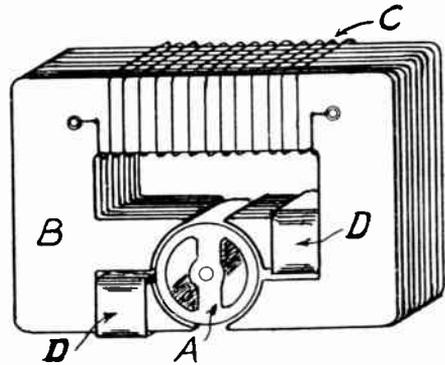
ARRANGEMENT OF PARTS OF SMALL TWO-POLE SINGLE-PHASE SYNCHRONOUS MOTOR.
